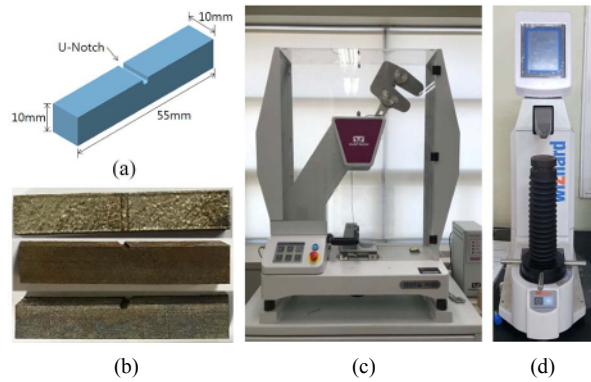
(a) The dimension of the impact test specimen; (b) real object images; (c) Charpy Impact equipment; (d) HR-521 Rockwell equipment.
